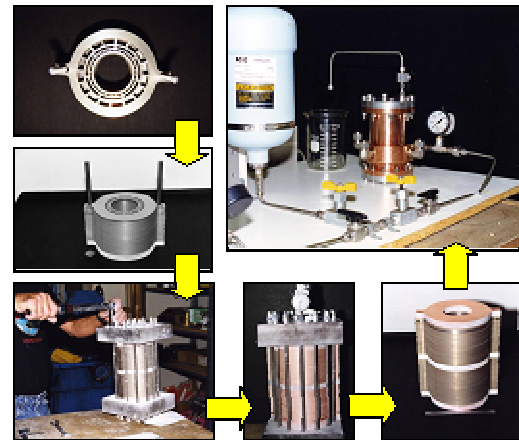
Platelet manufacture of a cylindrical heat-exchanger element using copper.
